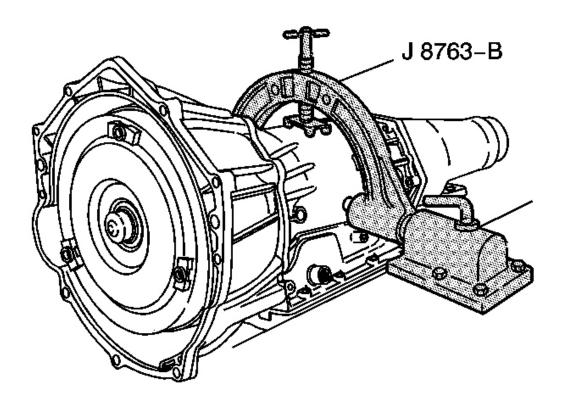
View Of J 8763-B Courtesy of GENERAL MOTORS CORP.
